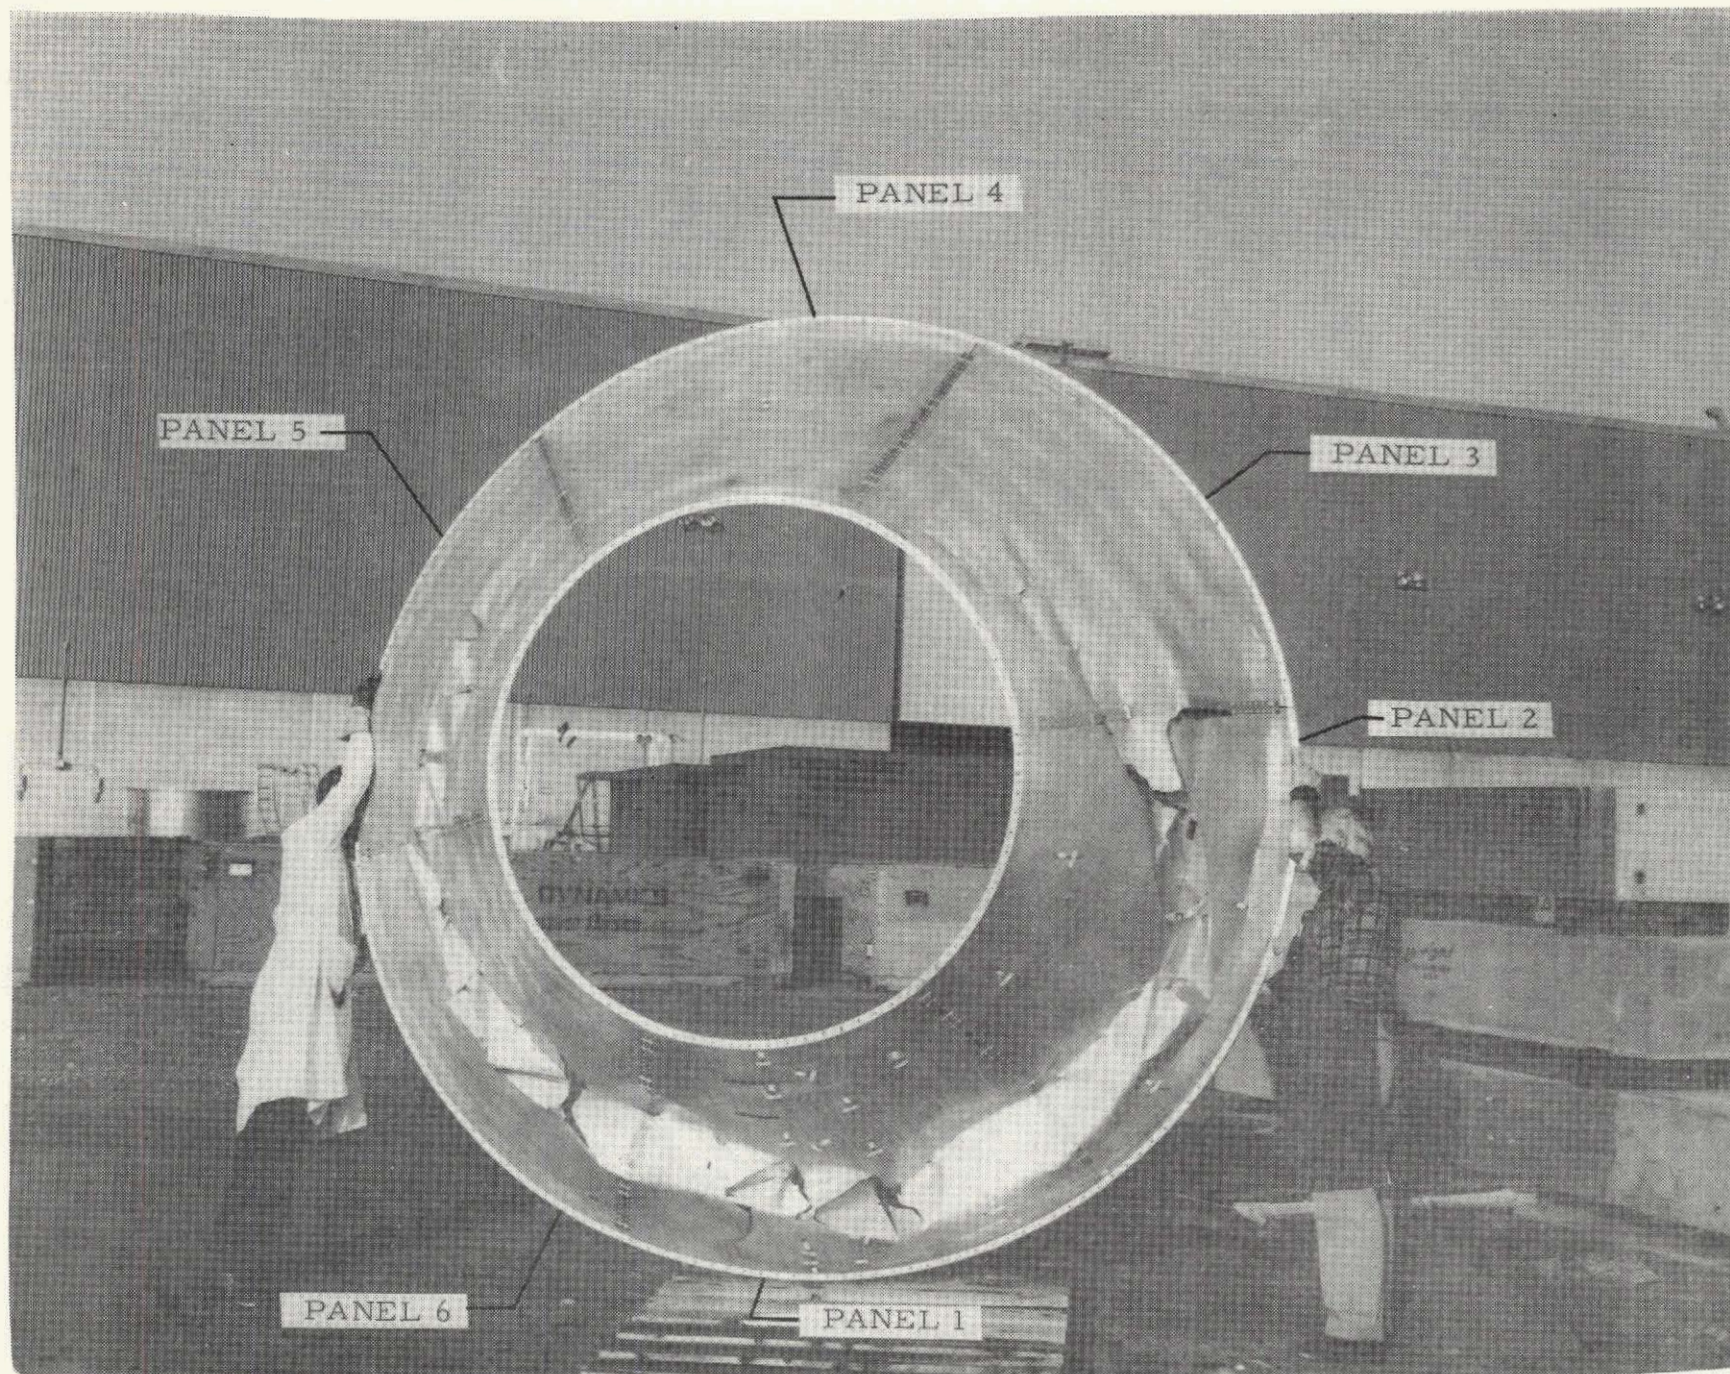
FAILED TEST SPECIMEN- EXTERNAL VIEW
